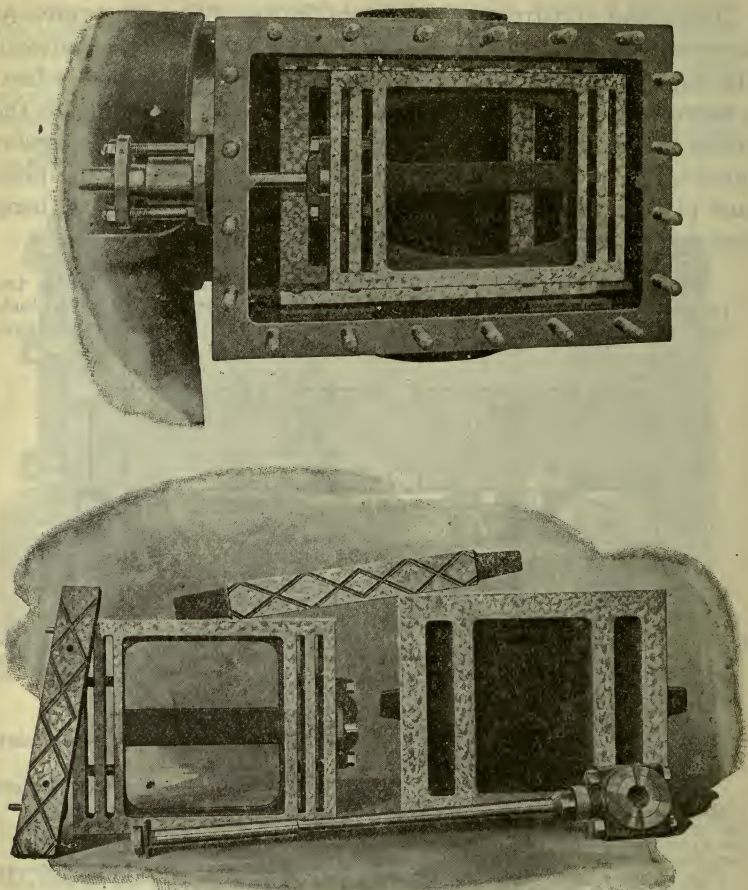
Sweet valve and valve stem, showing valve assembled in valve chest of Ames engine, and parts dissembled. The valve with stem, straps and pressure plate as used on the Ames engine. The valve consists of a rectangular casting accurately finished to exact thickness; it operates between the seat and pressure plate which is maintained at the proper distance from the seat by the two strips of iron. The pressure plate is held in position by two flat springs, so arranged that in case the engines receives a charge of water the pressure plate is forced from its seat, allowing the water to pass directly to the exhaust pipe.
